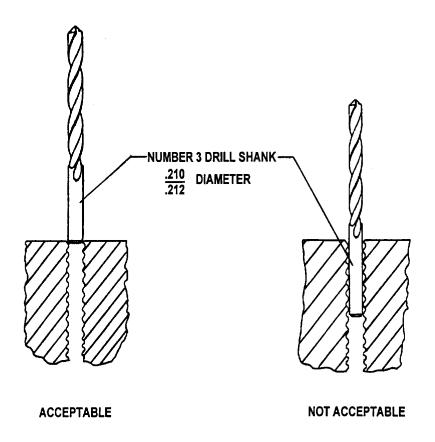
INSPECTING .250 - 20 TAPPED HOLES
